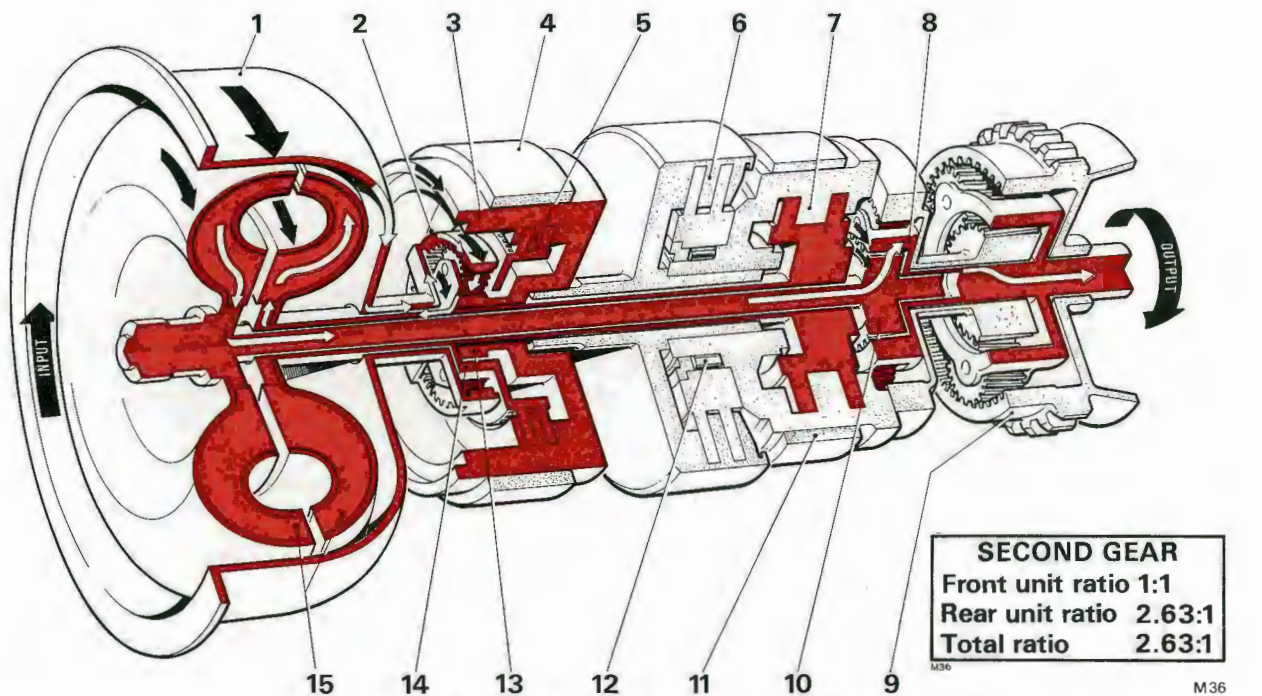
LINE OF DRIVE IN 2nd GEAR
